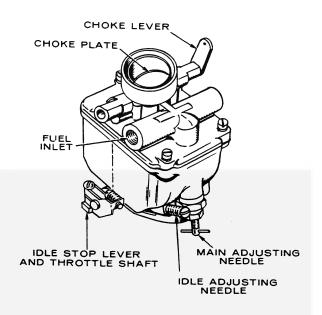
GASOLINE IDLE ADJUSTMENT
